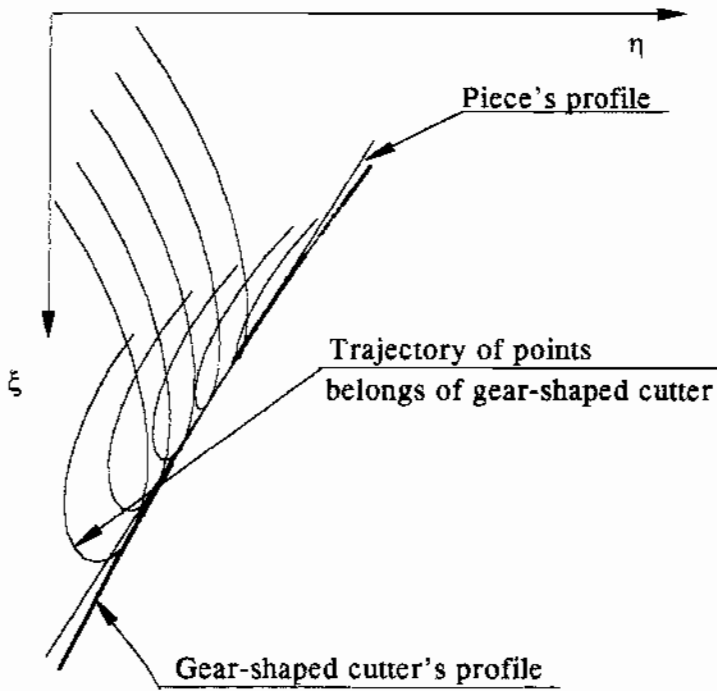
The profile of the gear-shaped cutter for internal chamfer grooves engendering.
